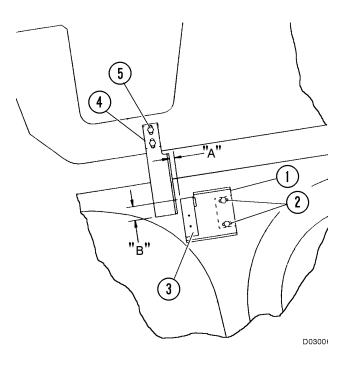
BODY-UP SWITCH ADJUSTMENT
